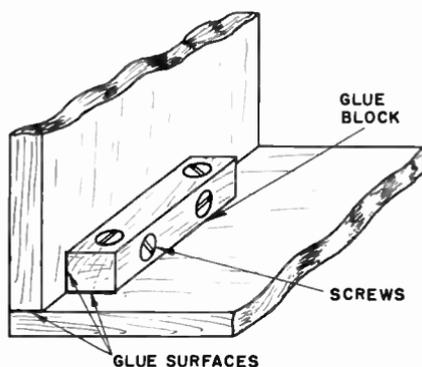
The use of glue blocks in cabinet construction insures squarely braced surfaces, a means of screwing the panels together to hold them while the glue is setting, and a means of construction whereby screws do not show on the finished surfaces.
